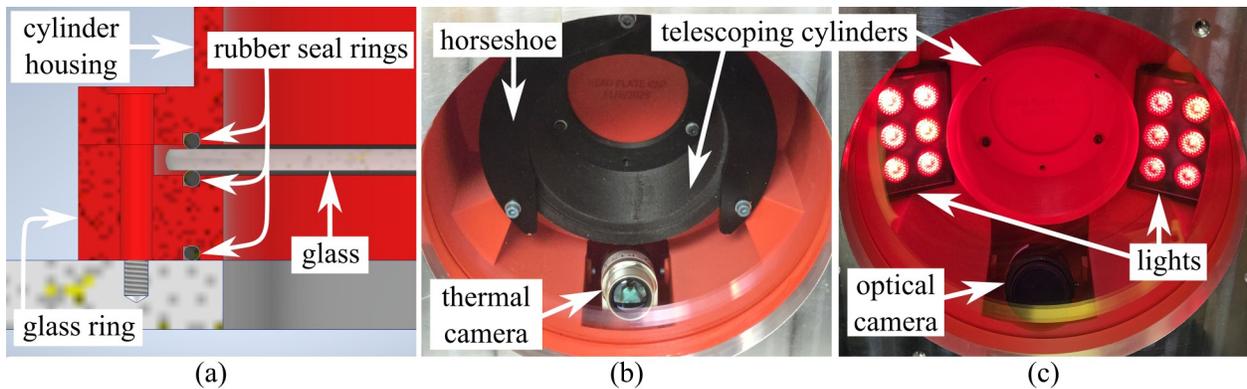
(a) cross-section view of glass seal installation and underside views of the (b) thermal camera cover and (c) optical camera cover assemblies with the anti-reflective glass.
